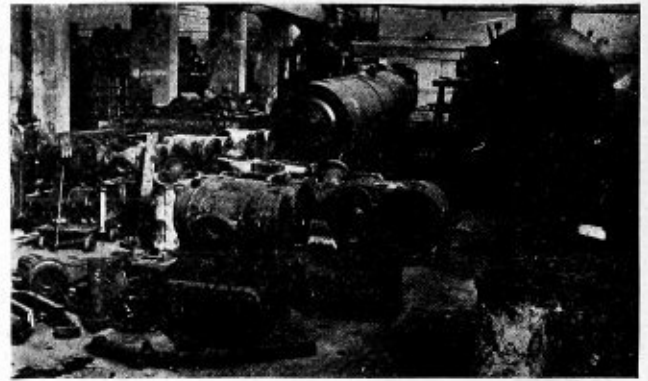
Corner of Erecting Bay in Nevers Shops
